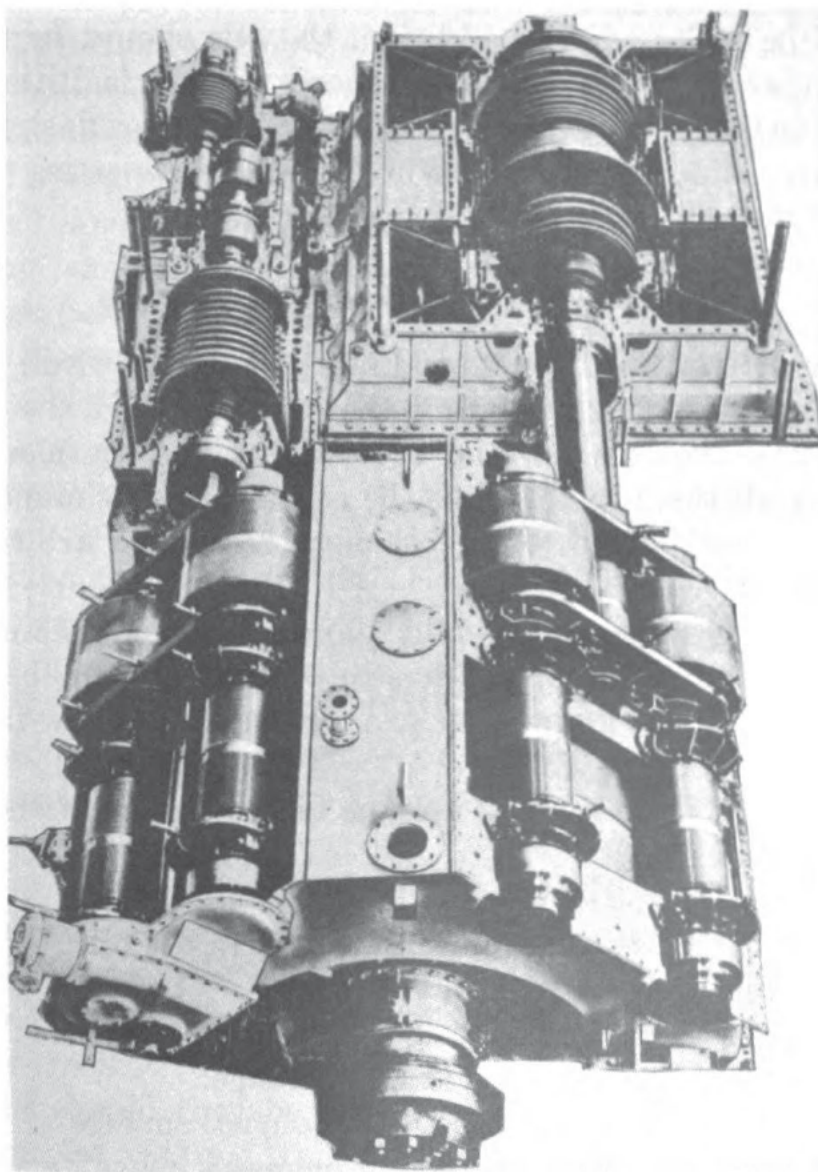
Steam turbine and reduction gear with casings removed.
